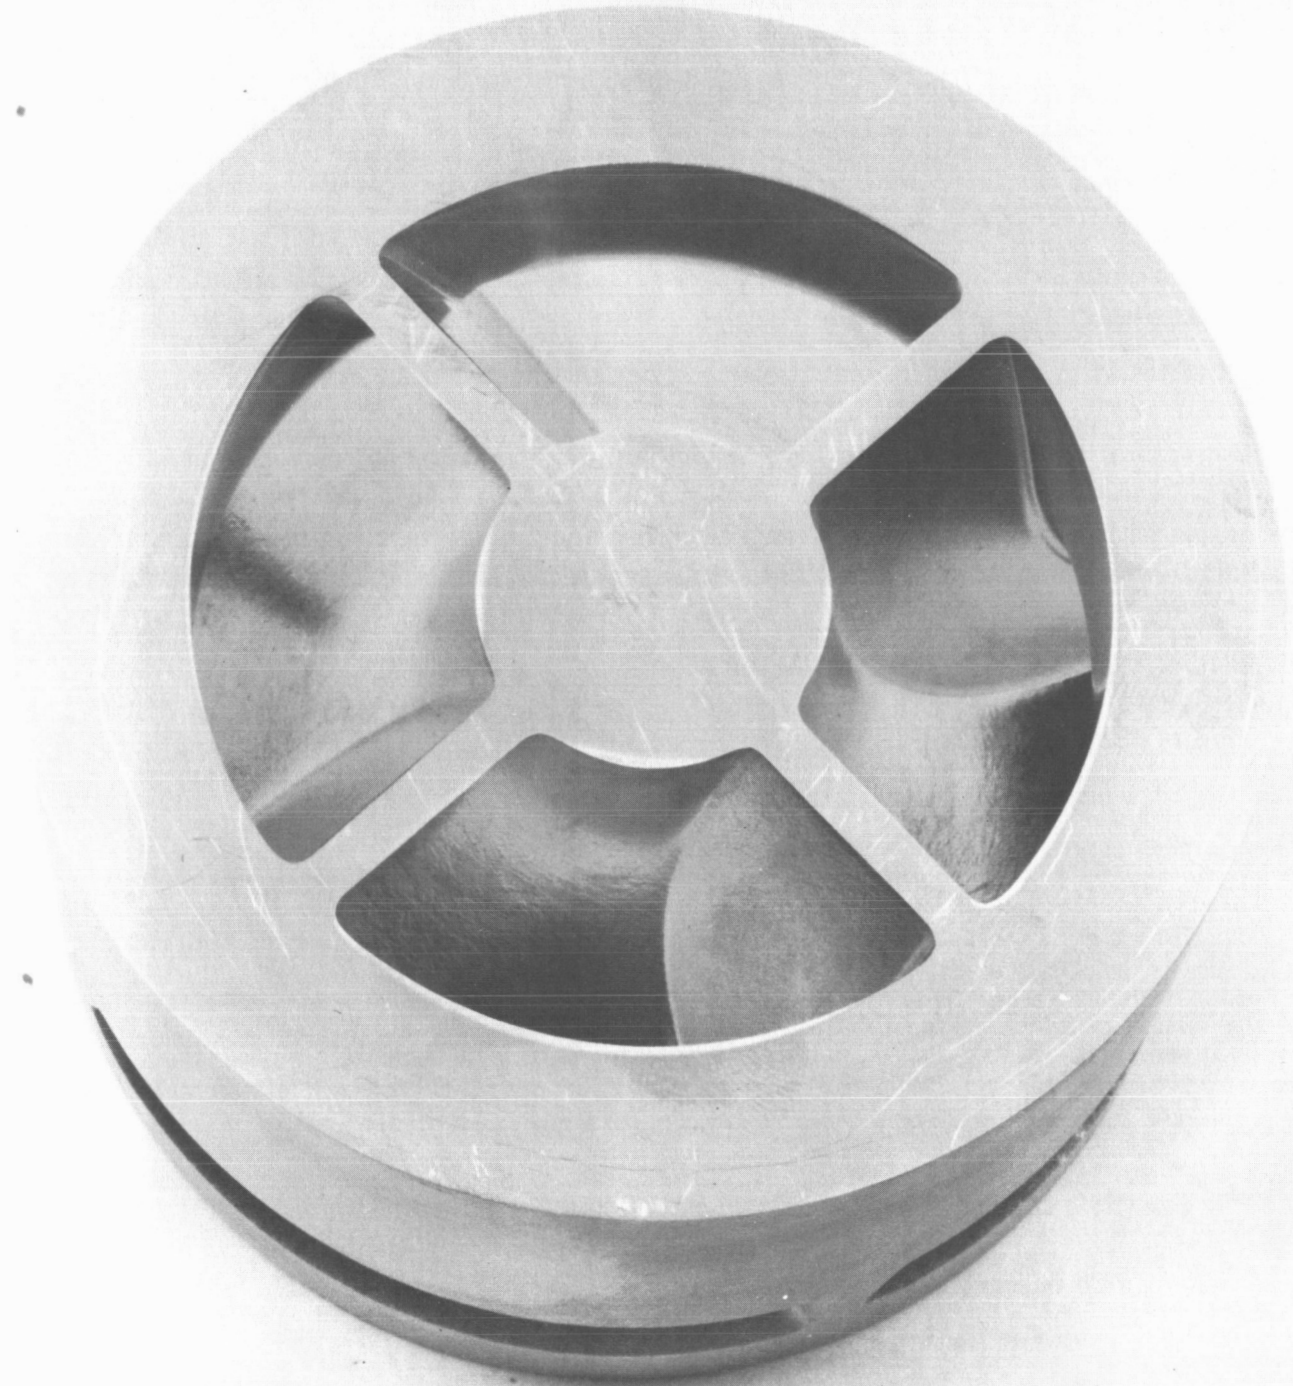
First Trial Sample After Final Chem-Milling - Eye View
